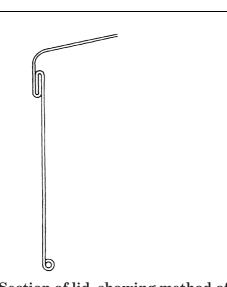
Section of lid, showing method of seaming on flange, and form of internal bead
